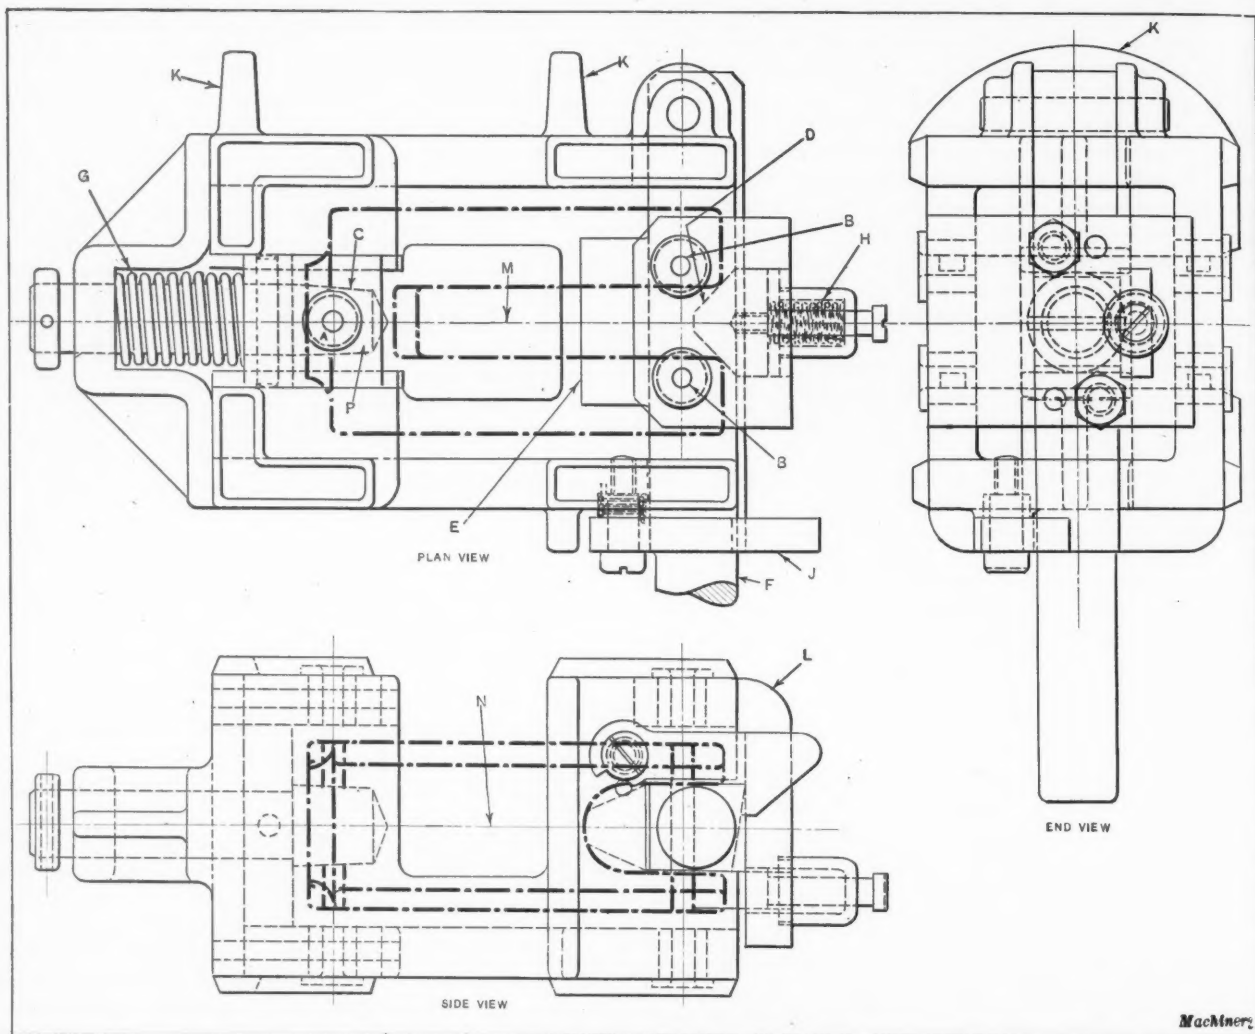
Special Jig used in drilling Malleable-iron Casting
